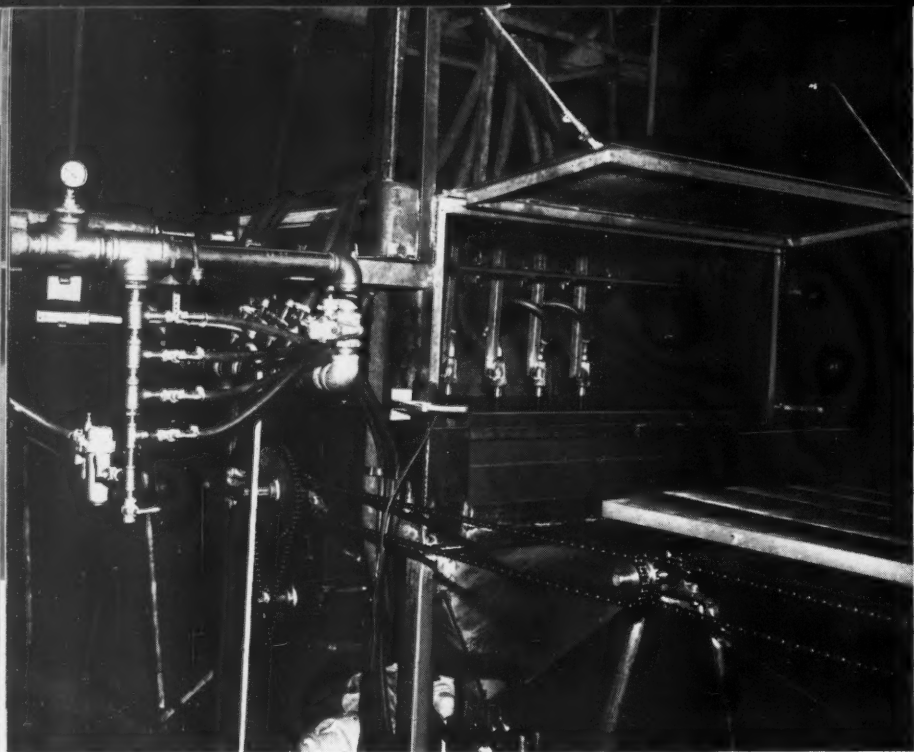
Conveyor drive originates at electric motor beneath the cabinet and is transmitted through chains meshing with sprockets on the rollers.
